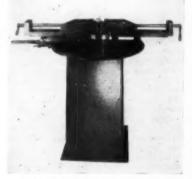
Modernized design of bender with arc welded parts.
